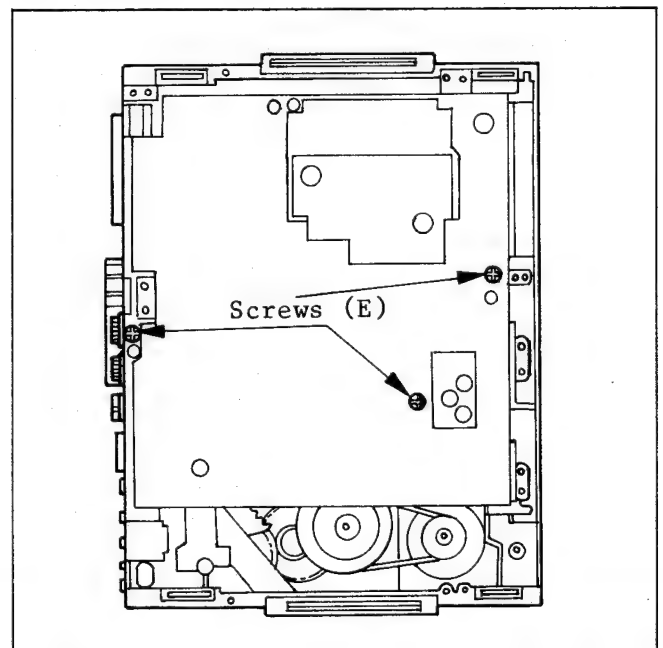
Opening of Bottom & Front P.C. Boards-(1)
